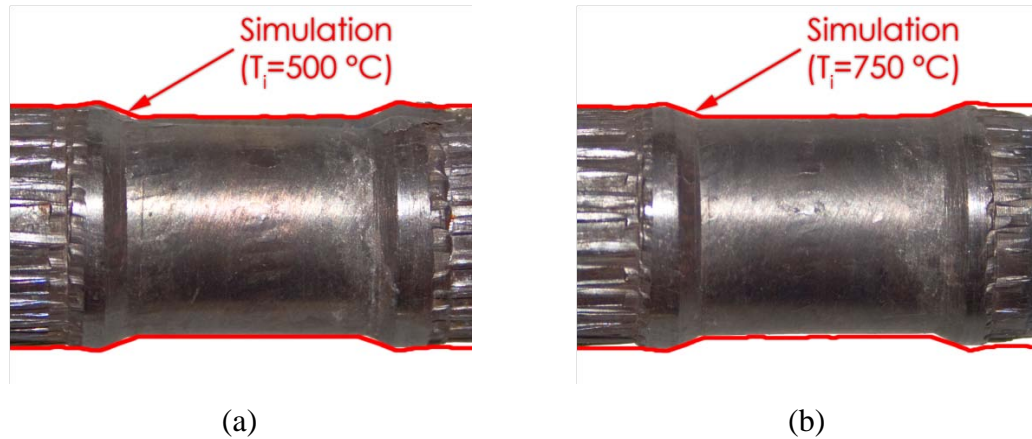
The picture of cross-wedge rolled Ti6Al4V workpiece and the simulation deformed shaped of the same workpiece (red line shows simulation), workpiece initial temperatures (a) 500 °C and (b) 750 °C.
